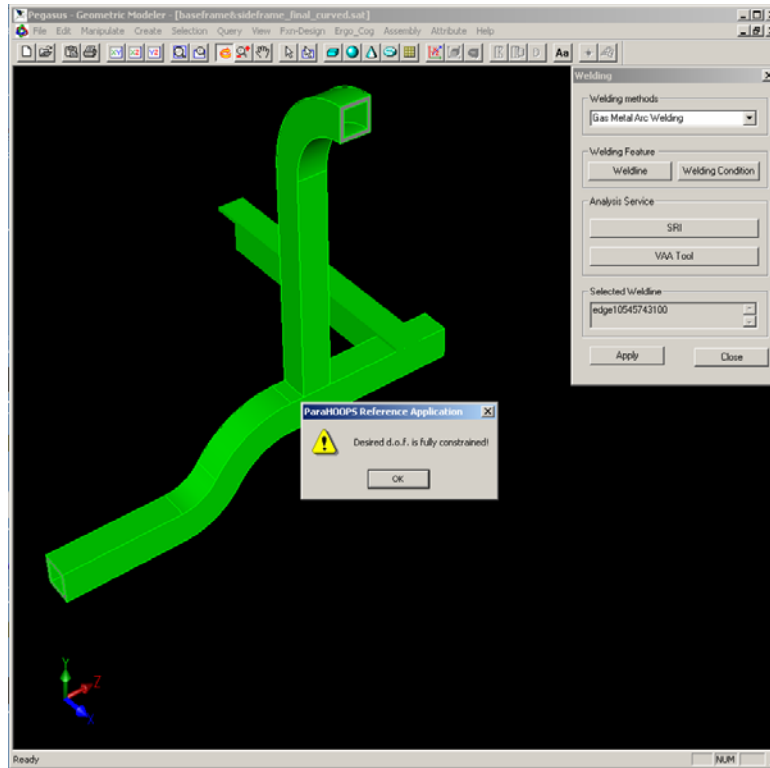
SRI tool indicating that welding satisfies the designed d.o.f.
